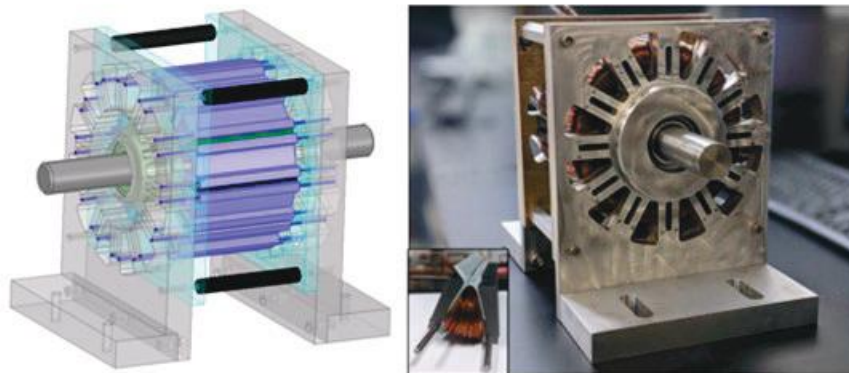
The CAD drawing and photo of the full assembly for the open frame lab prototype motor.
